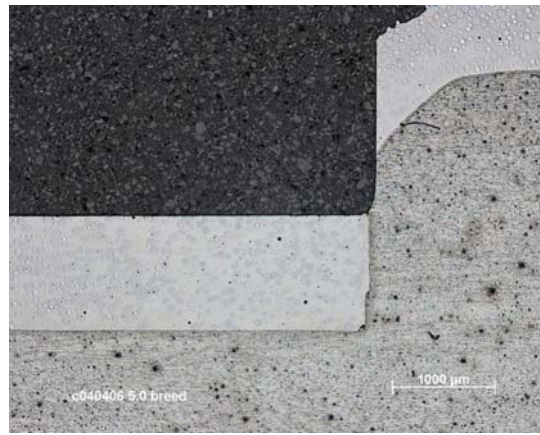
Cross section of laser clad on micro-tensile test specimen.
